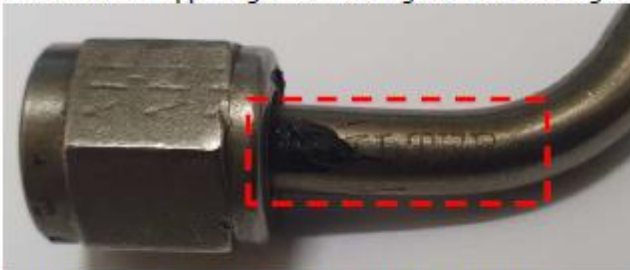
Fractured Tube: "Filter" inscription (Digital)
